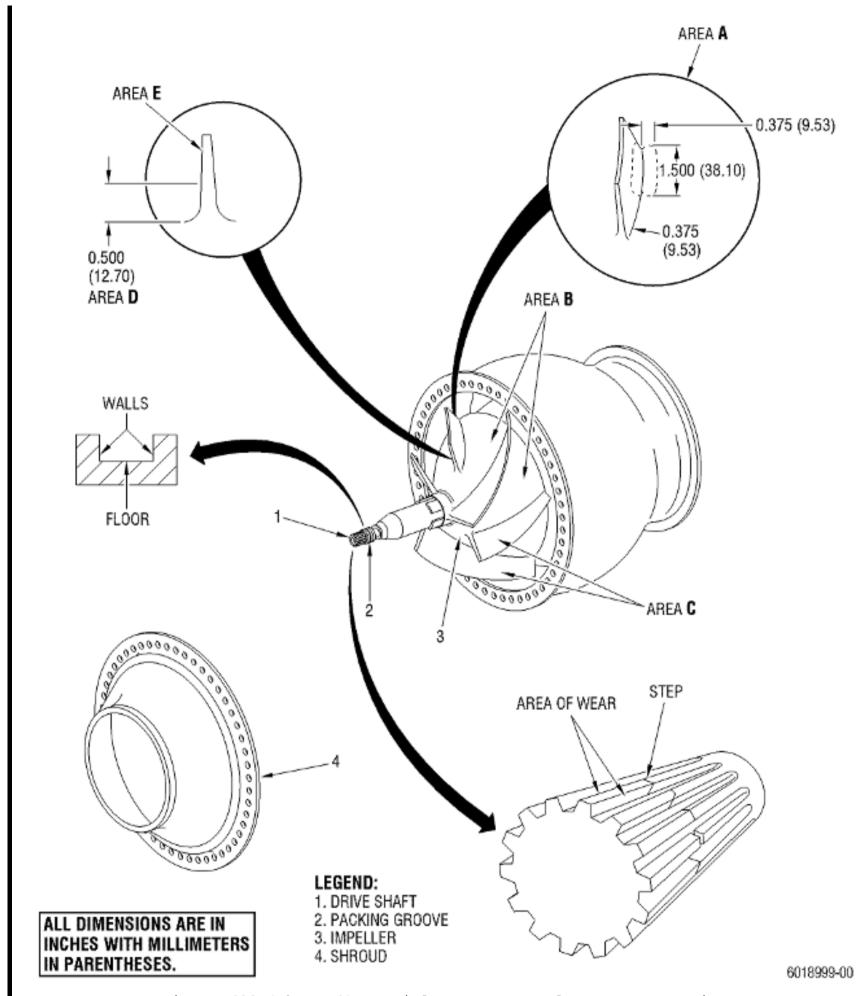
(Sheet 4) Particle Separator Blower - Inspection
